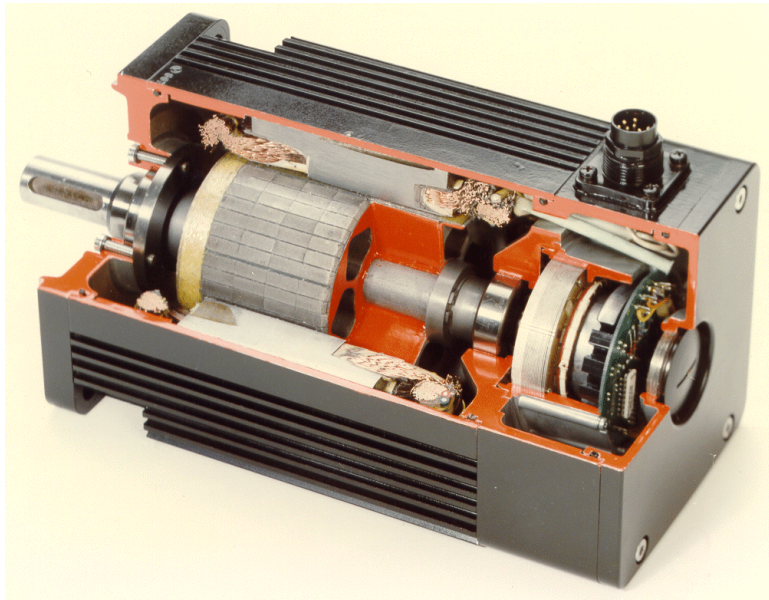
EC motor (3 kW, manufacturer: Bosch)
